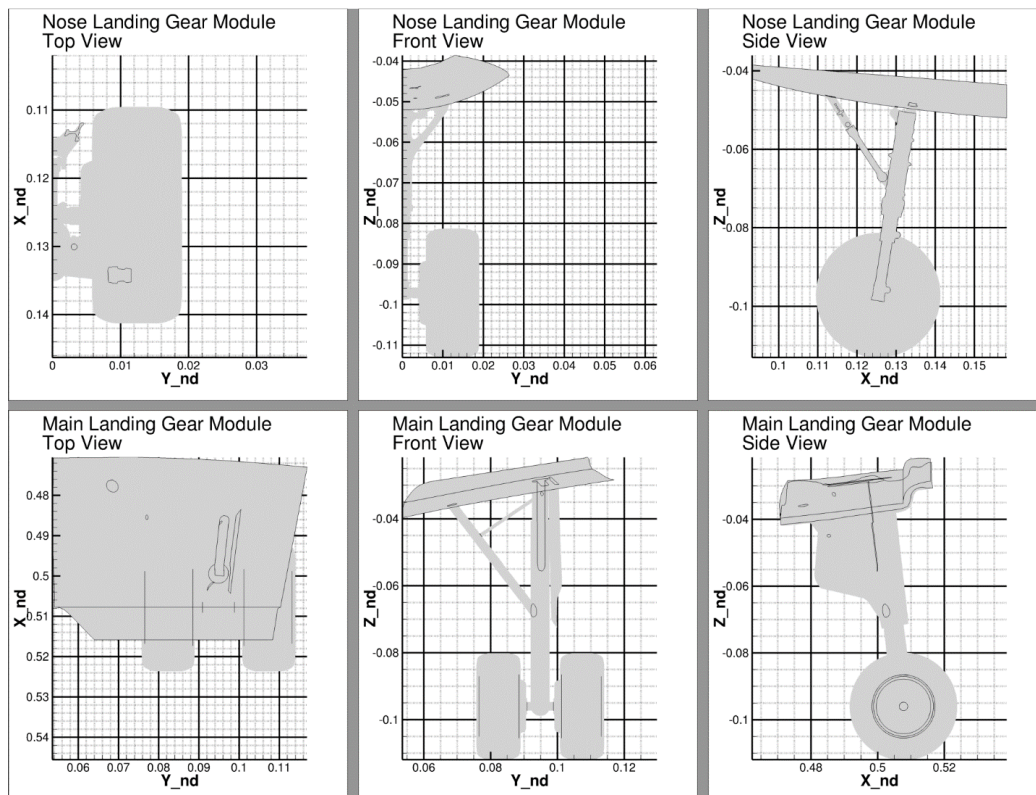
Two-Dimensional View of the Landing Gear Modules
